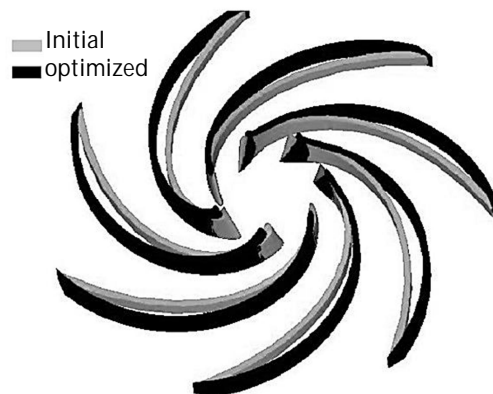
Comparison of initial shape of impeller and optimized shape of impeller.
